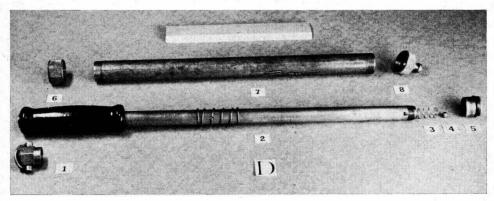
Unit "D" hand pump. (1) Interchangeable nozzle with revolving pin, (2) Plunger with shock absorber spring, (3) Outlet valve spring, note spring-retaining tabs as bent-in sections of plunger wall, (4) Outlet valve ball, (5) Outlet valve body with neoprene piston ring, (6) Cylinder cap containing neoprene packing ring, (7) Cylinder, (8) Inlet valve assembly and snap-on hose coupling.
